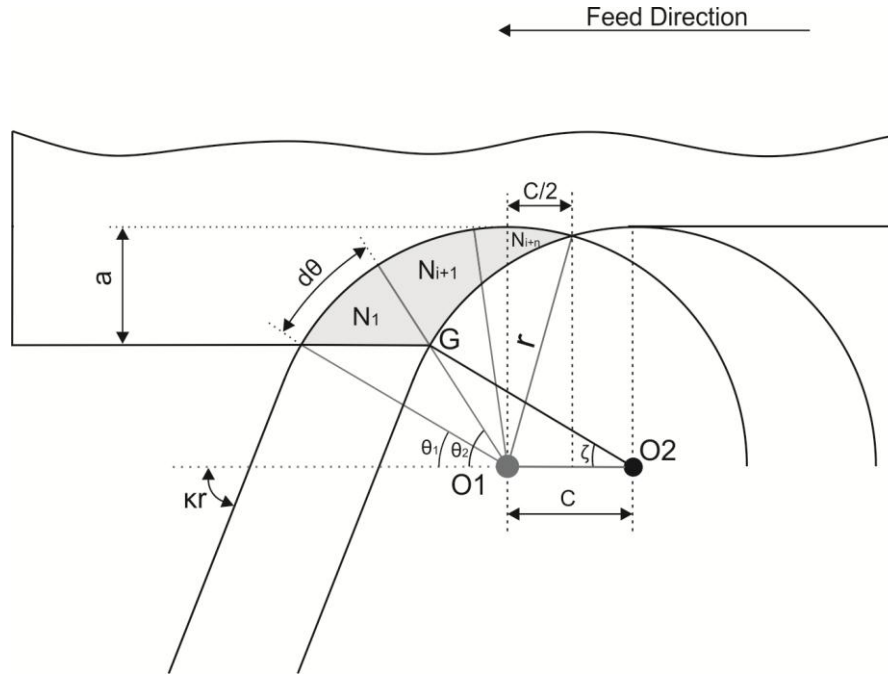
Schematic of a Turning Tool Engaged with a Workpiece When $a < r$. ($1 - \cos(kr)$)
